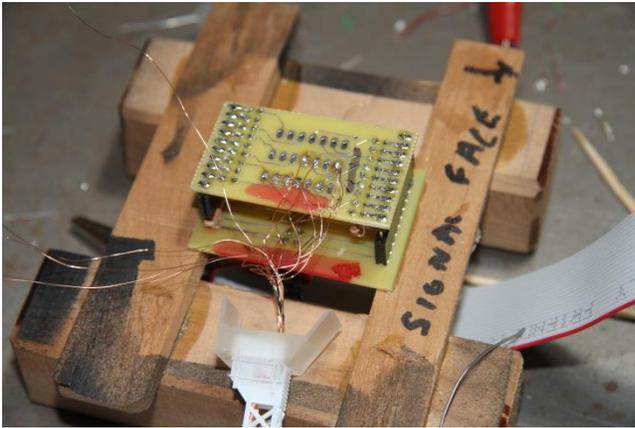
Tinned wires being soldered to the base plug. Leave as little uninsulated wire as possible above the circuit board.
